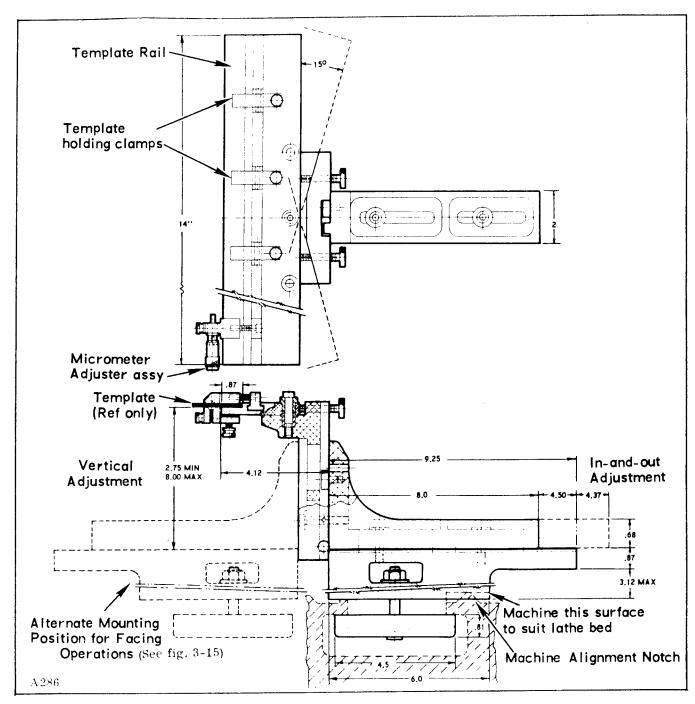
Typical Installation of the 40685 Template Rail Assembly. (Used with Mark "O-A" Series)
